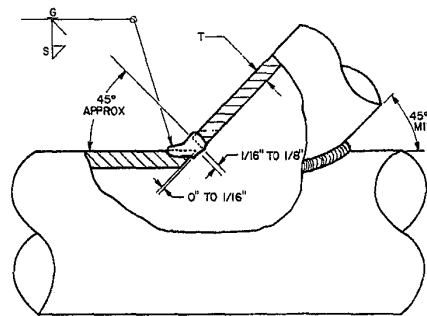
Fillet Welded Internal Root Connection
